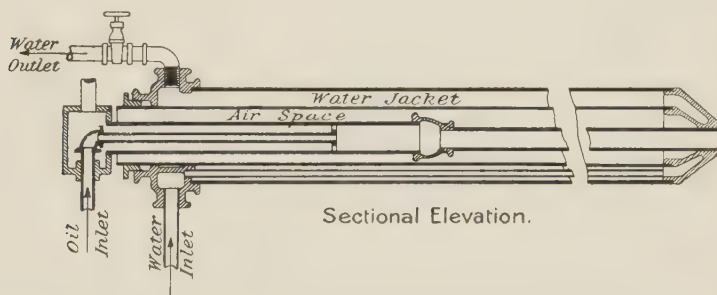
Liquid Fuel Burner for Open-hearth Furnaces.
